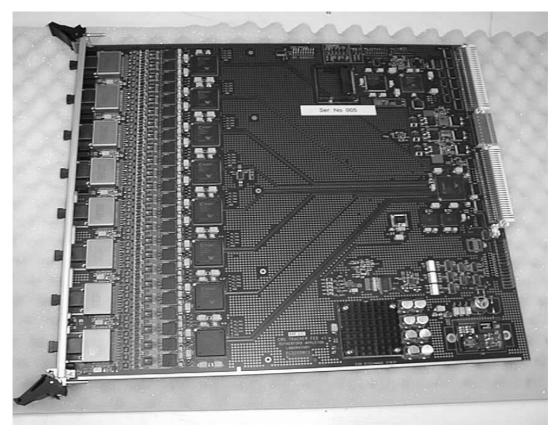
The first assembled final Front End Driver containing all optical receiver modules.
